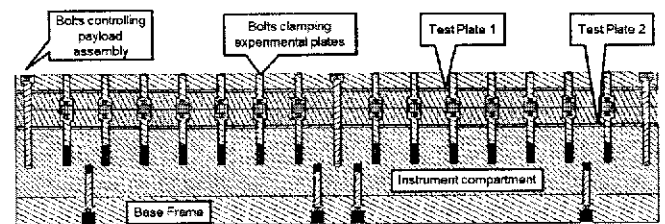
HEAD TO HEAD BOLTING PATTERN
